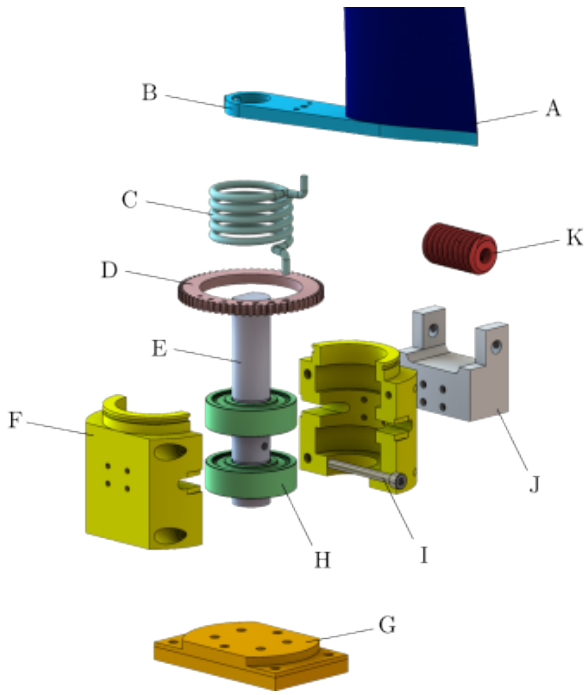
Exploded view of the passive pitching mechanism, with annotated components: (A) turbine blade; (B) spacing arm; (C) torsion spring; (D) preload spur gear; (E) pitching shaft; (F) mechanism frame; (G) mounting plates; (H) ball bearings; (I) retention and limiting screw; (J) preload worm mounting frame; (K) preload worm.
